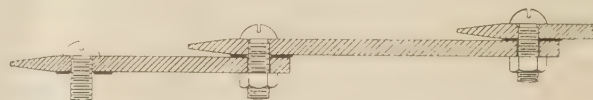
SUGGESTED FORM AND METHOD OF ASSEMBLING SQUARE-EDGED ORIFICES
